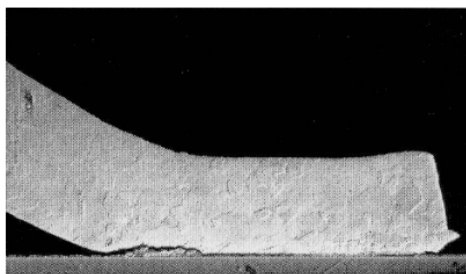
Cross-sectional view of a crack between the bond wire and chip [1].
